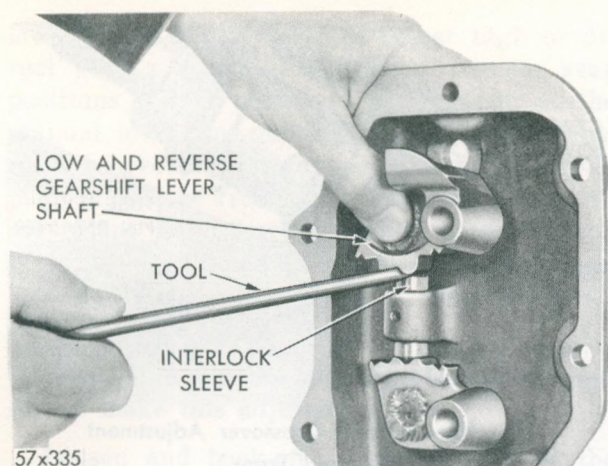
Engaging Low and Reverse Gearshift Lever Shaft Ball with Interlock
